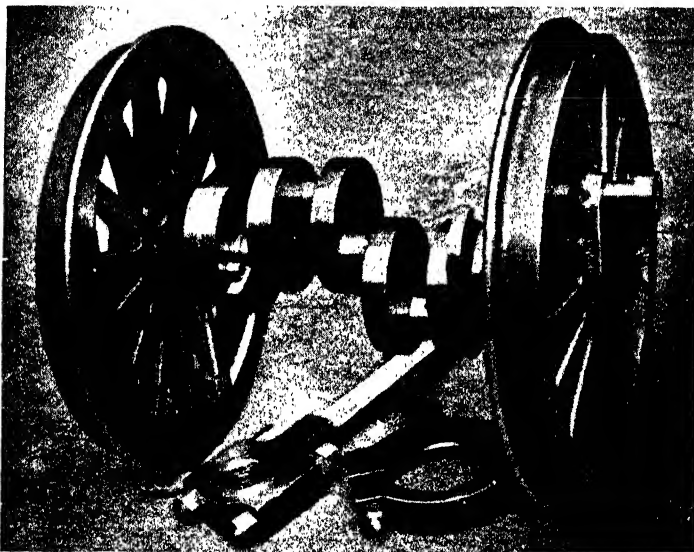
Crank Axle with Outside Slip Eccentrics.
